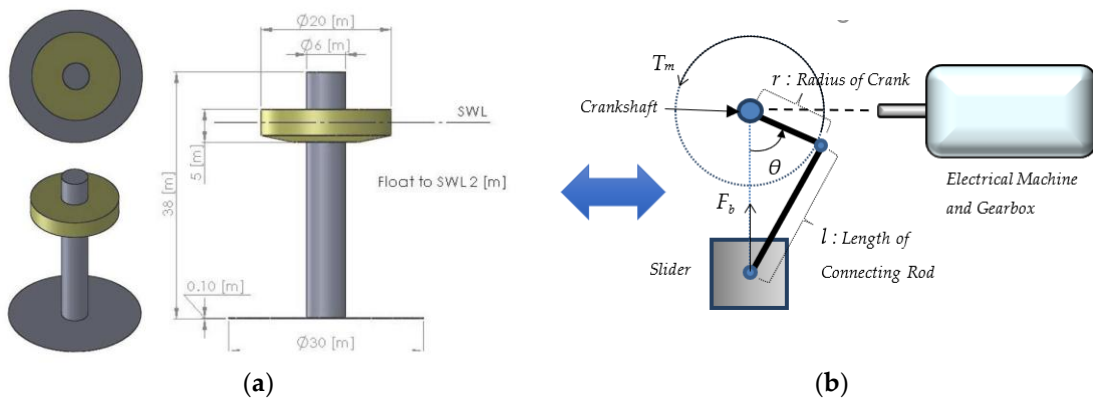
Integration of various components of the WEC system. (a) WEC-Sim RM3, (b) slider-crank linkage model, rotary electrical machine, and gearbox [20].
